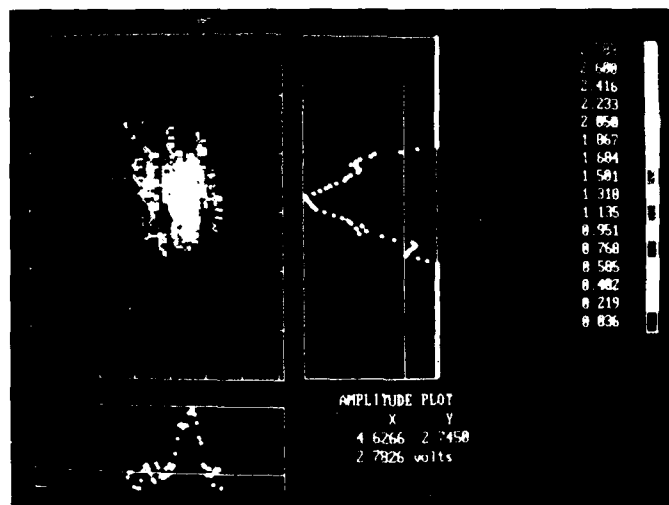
Image of a defect in a flange weld A3B1 using a 45 degree, 2.25-MHz beam. Amplitude C-scan using a 25% threshold.
